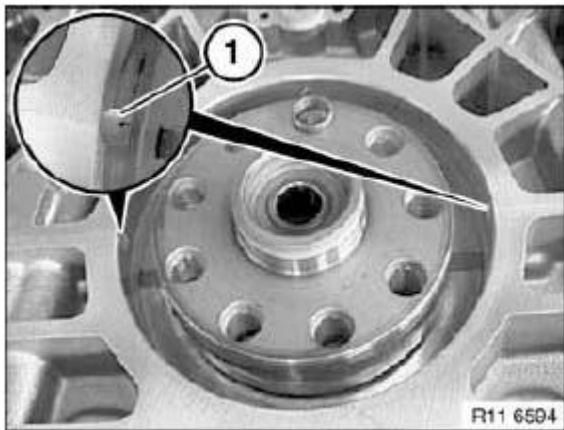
Removing Radial Shaft Seal With Impact Weight
